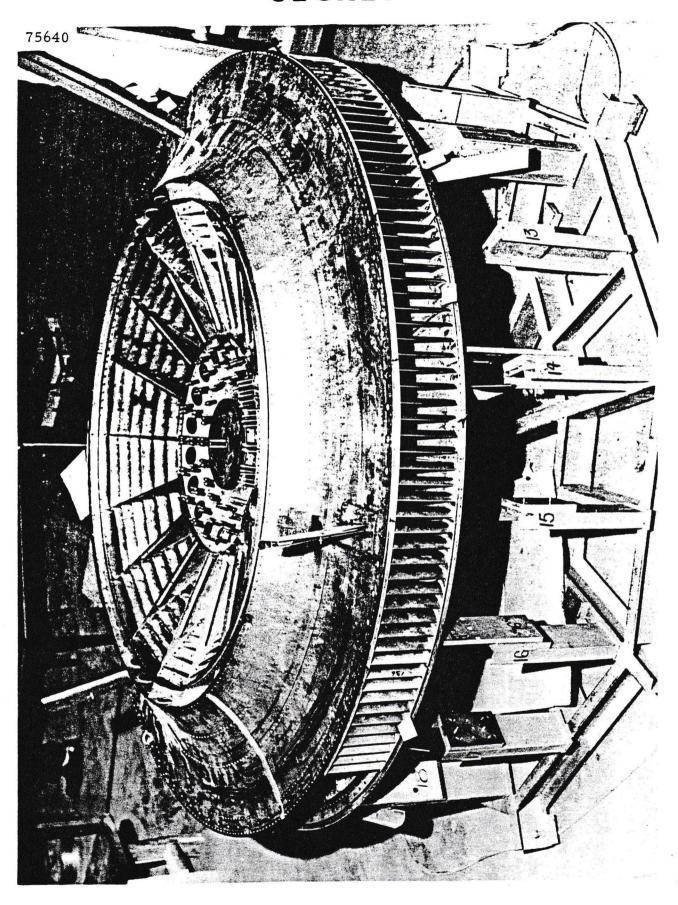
FIXED CENTRE STRUCTURE - TURBINE AND COMPRESSOR IN ASSEMBLY JIG
